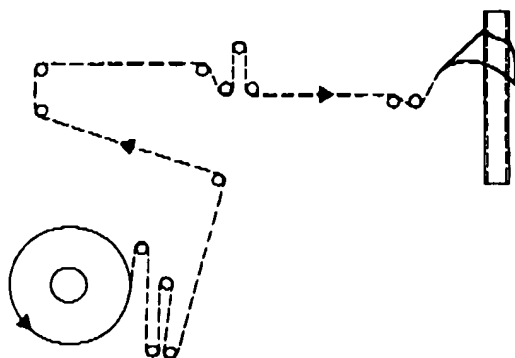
Typical film feed path through a vertical form/fill/seal machine.
